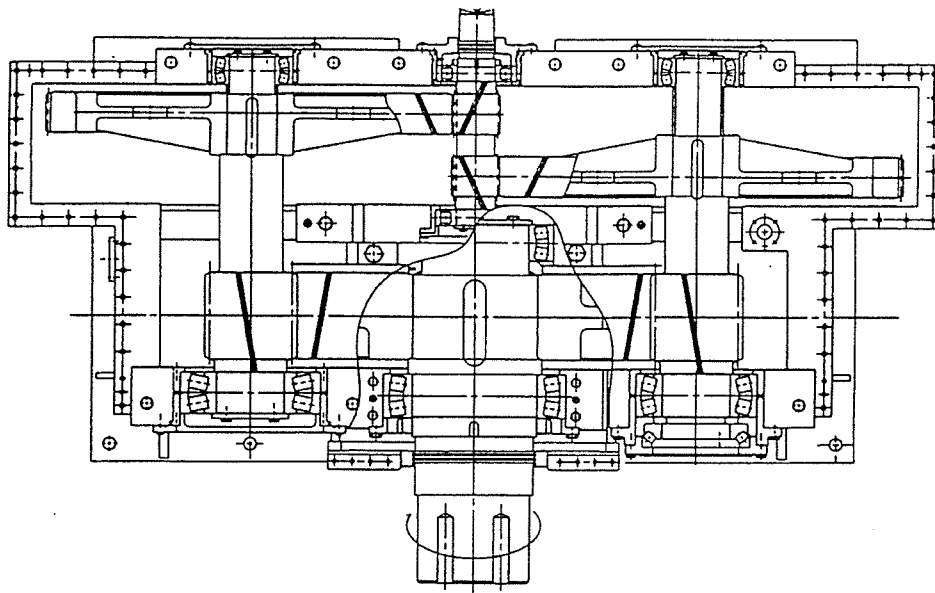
Center drive type for ball mill (Parallel shaft reduction gear)
